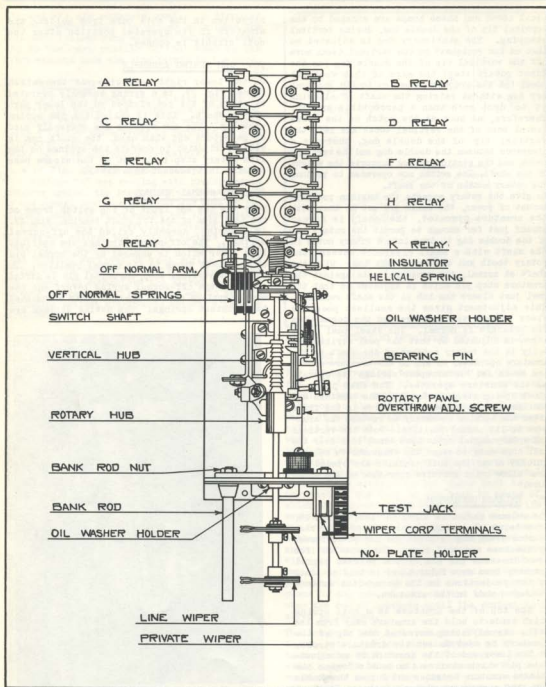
CONNECTOR SWITCH, FRONT VIEW
